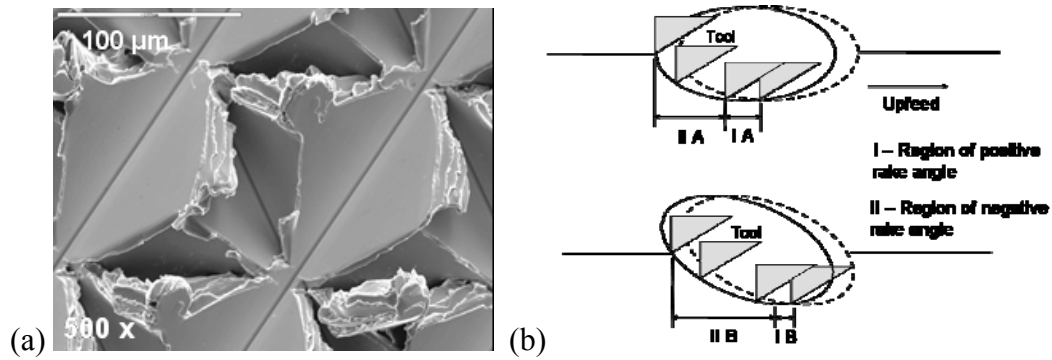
(a) Burr formation when attempting to machine trihedrons in 17-4 PH stainless steel. (b) Tilting toolpath achieves longer distance of cutting with positive rake angle (length of I-B > length of I-A) and smaller value of negative rake during rest of cutting pass. It is suggested that this will help suppress burr formation.
